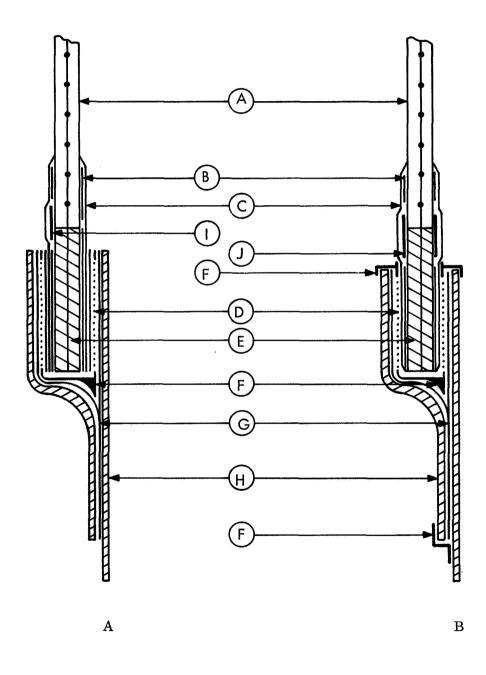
Schematic A, B, Cross Section of Transparent Window in Flexible Glass Cloth Panel
